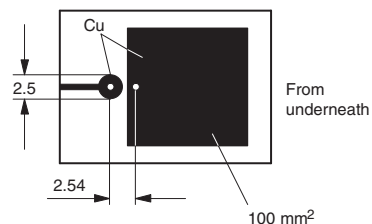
In Case of Assembly on PC Board, with Heatsink (Curve A, Figure 4)
